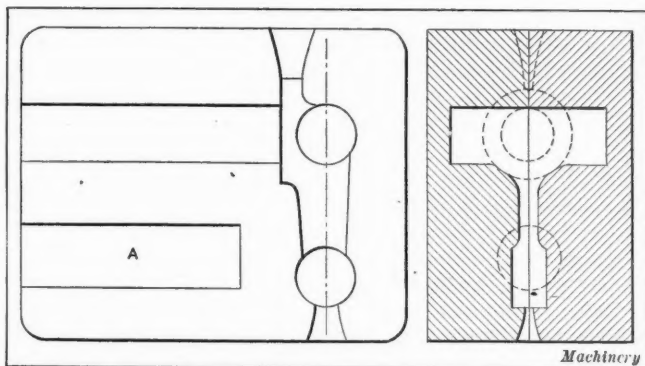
Finishing Dies for Piece shown in Fig. 12
